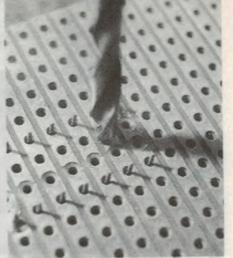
How Vero-board tracks can be cut easily using a twist drill as 'countersink'.
